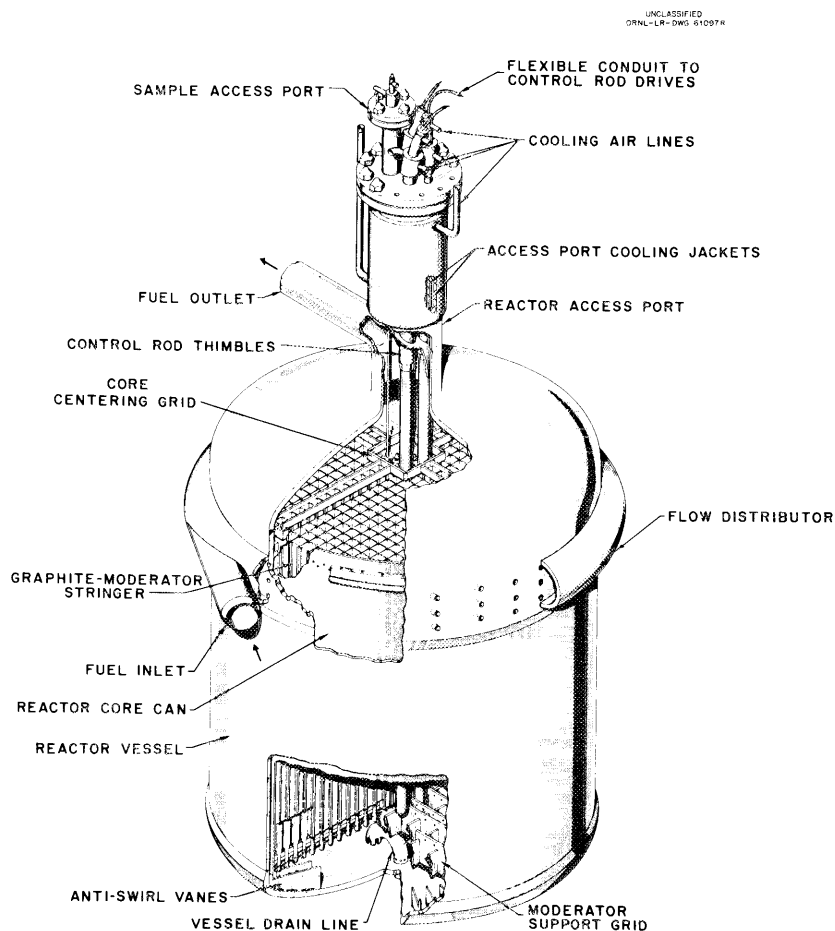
Cutaway Drawing of MSRE Core and Core Vessel.
